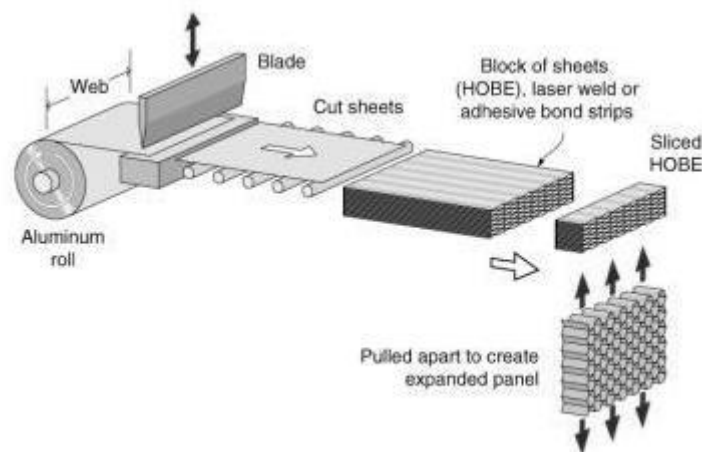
Expansion Honeycomb Manufacturing Method
